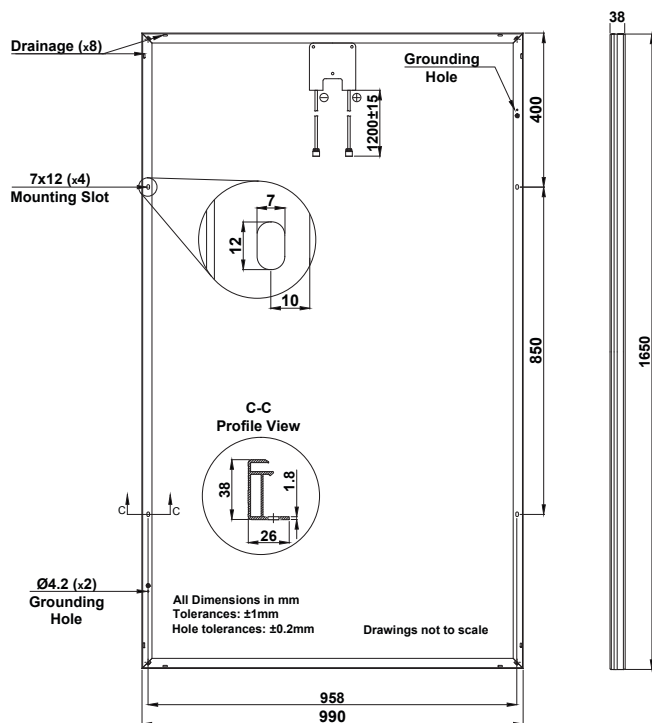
Mechanical drawing of the SLA/SSA module showing the mounting holes, the drainage holes, and the ground connection holes
